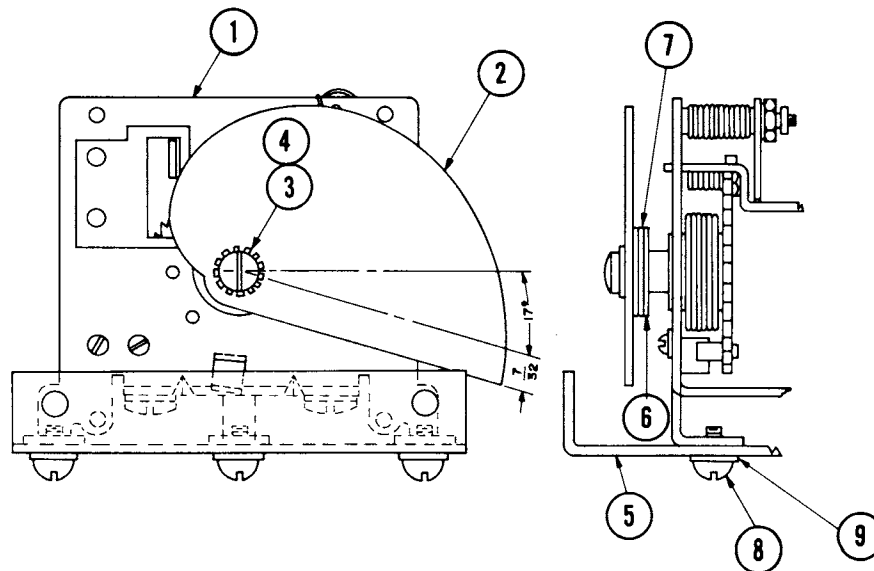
Assembly, Stepper, WW-4671-1B (Part of Assembly, Figure 5).
